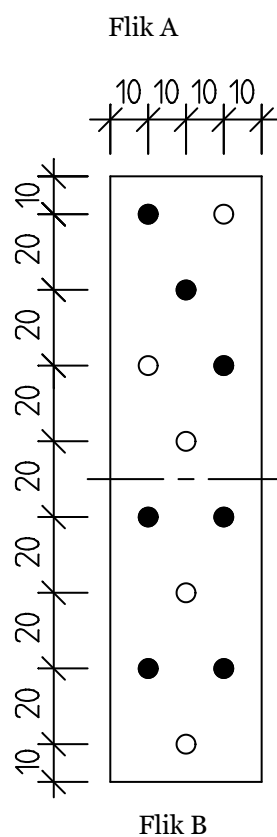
Dimensions of Angle Bracket type 1/80x80x2,0/2,5x40
